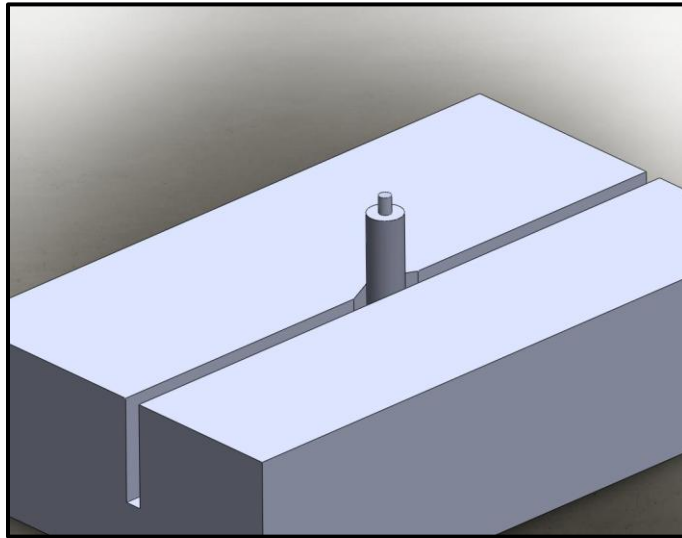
The rod is clamped in a milling vice, orthogonal to the table.
